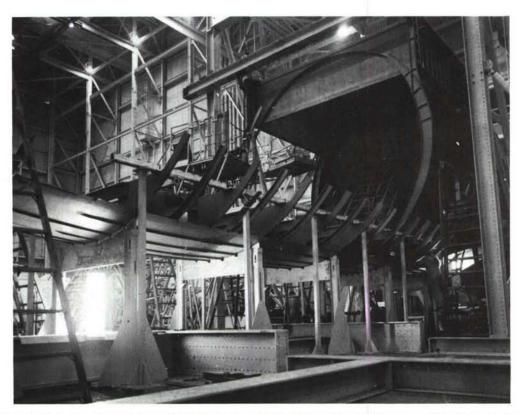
BOTTOM CONSTANT SECTION AND LOWER NONCONSTANT SECTION PANELS
